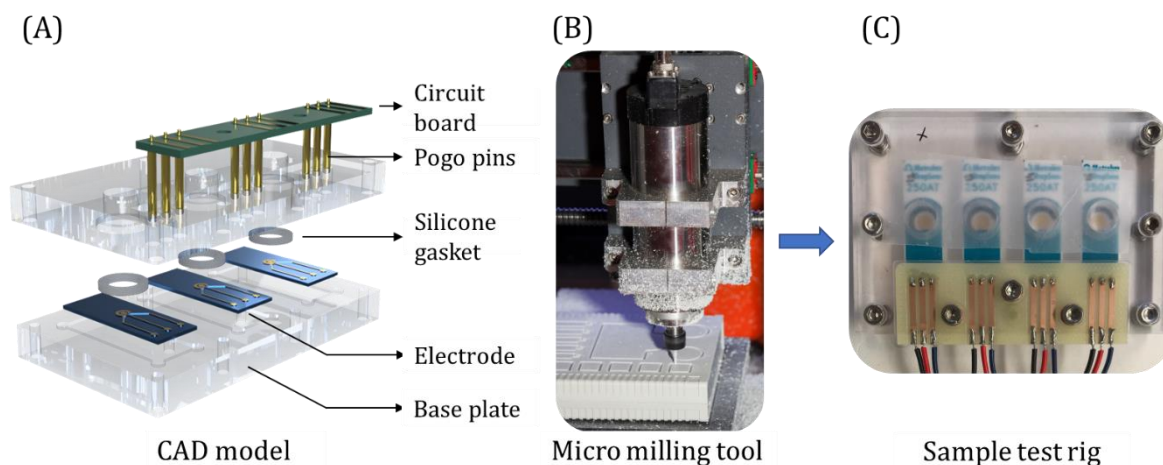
(A) CAD model of a required test setup (B) A milling tool in action (representative) (C) The finished test setup after assembling the different micro-milled parts.
